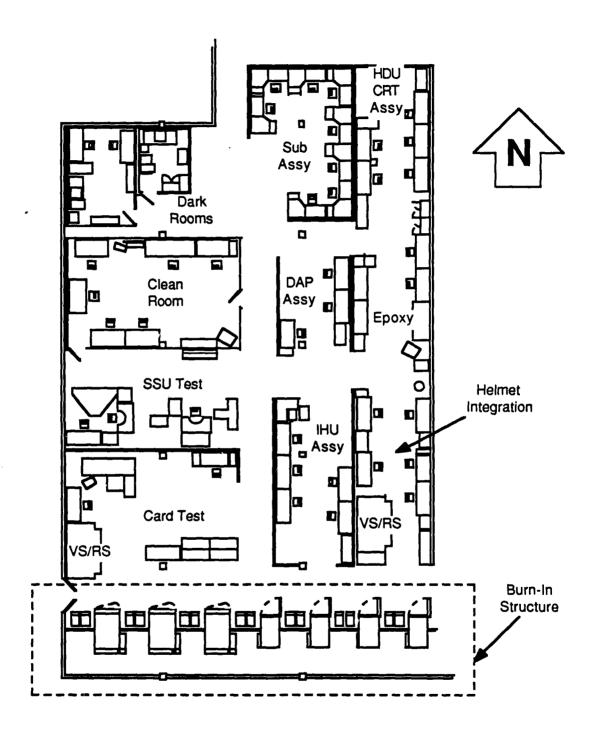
"To-Be" Targeting Area Layout
